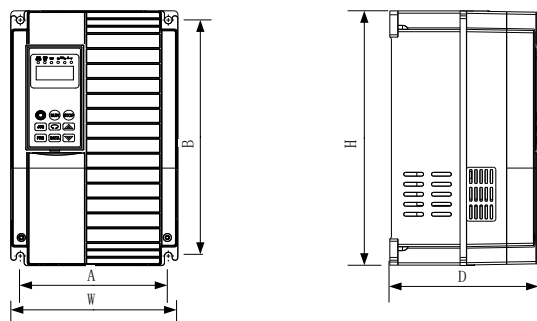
Schematic diagram of inverter wall-mounted installation
